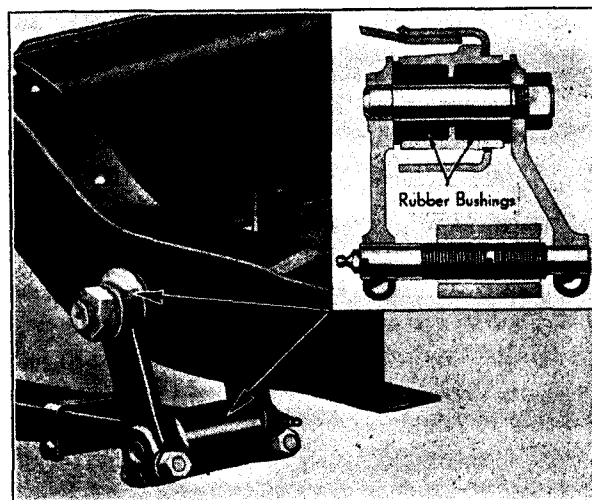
The rear shackles of the rear springs have rubber bushings at the upper bolt and a threaded metal bushing at the lower bolt
